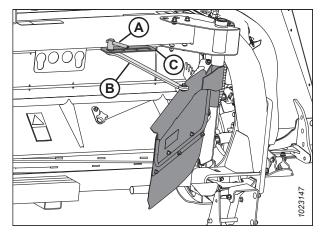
Forming Shield Side Deflector and Adjuster Bar
